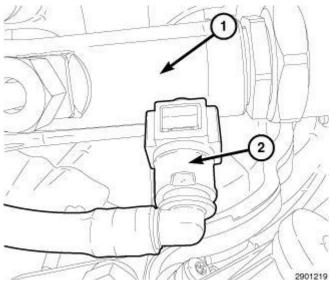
Fuel Return & Fuel Rail Courtesy of CHRYSLER LLC
